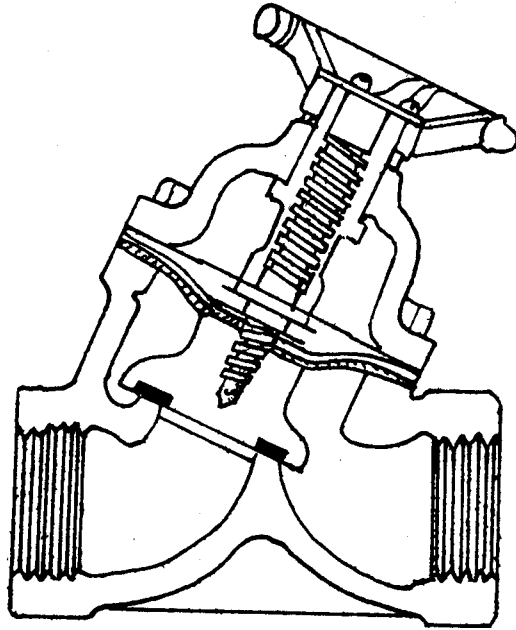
Globe-type valve with diaphragm bonnet seal.
